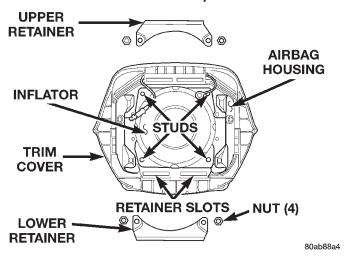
Driver Side Airbag Trim Cover Retainers Remove/Install - w/Speed Control
